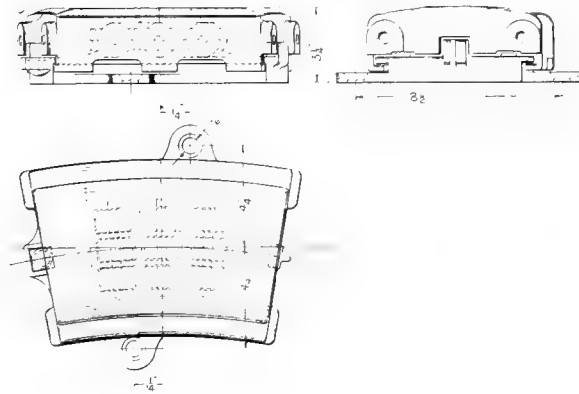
Creco Covered Roller Side Bearing for Freight Car Trucks.
